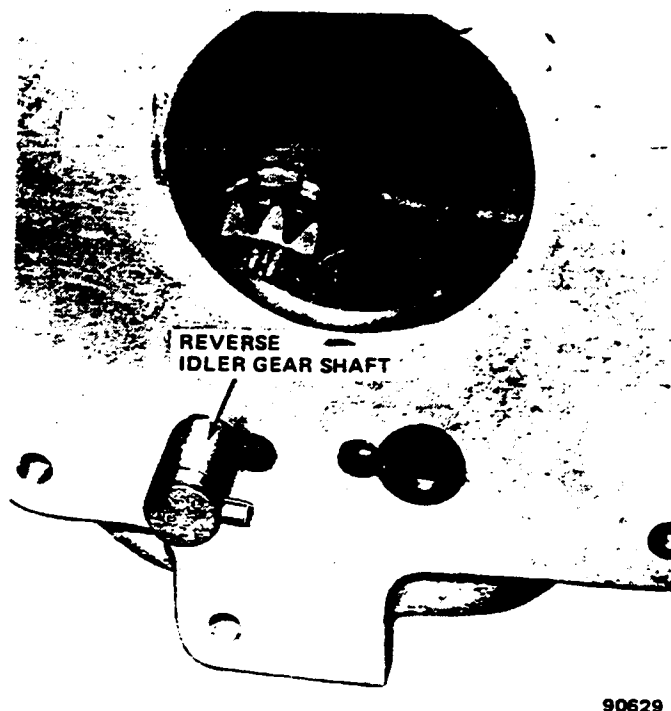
B-57 Reverse Idler Gear Shaft Removal/Installation
